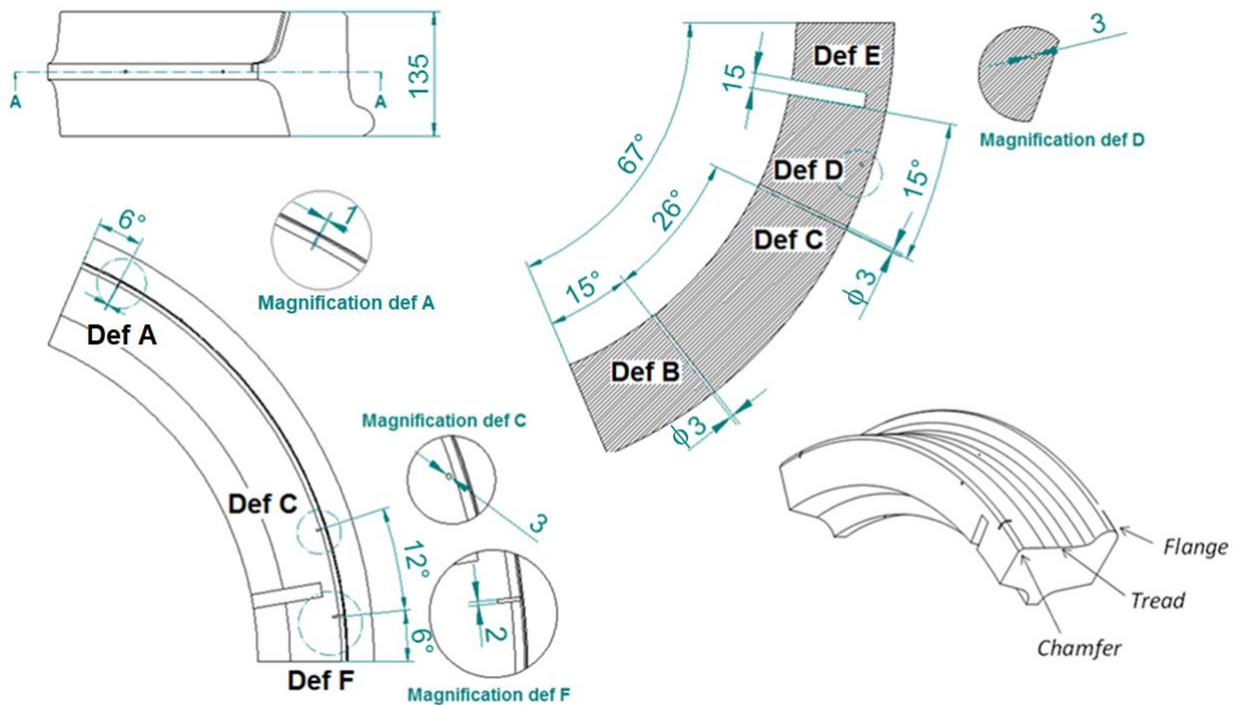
Draft of the train wheel sector with dimensions and positions of the reproduced standard defects.
